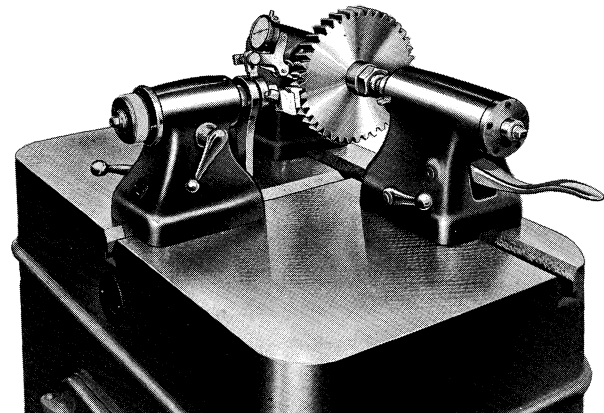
The ICB head that checks for index or tooth spacing.
